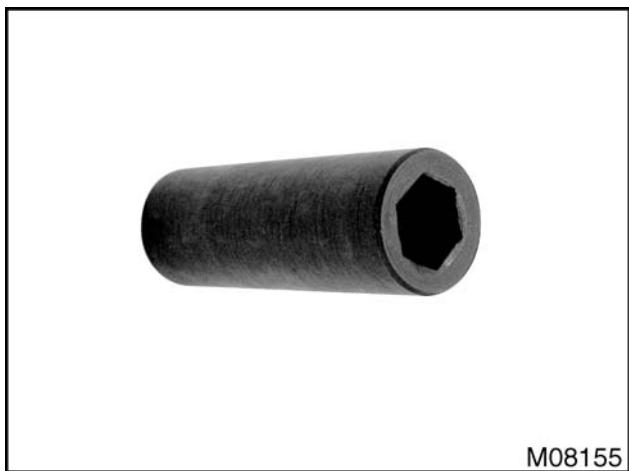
ZTSE4753 EGR valve bore cleaning brush
